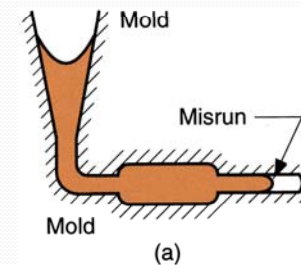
Some common defects in castings: (a) misrun
